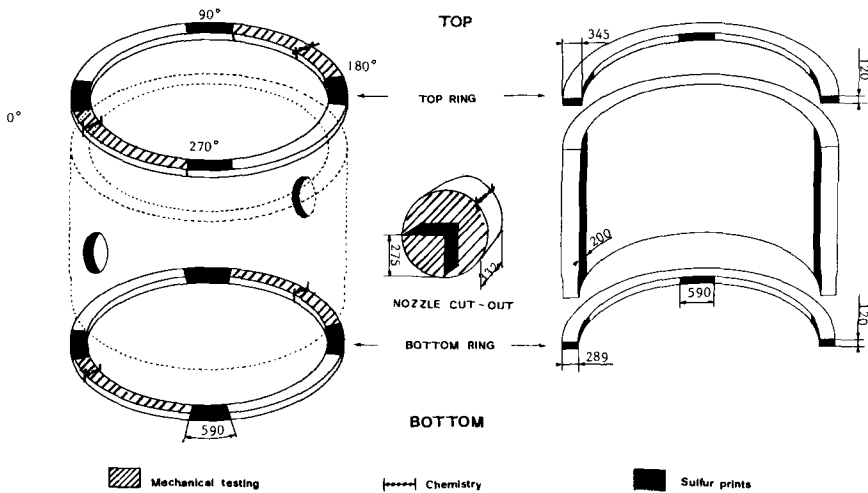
Shell and test rings manufactured from hollow ingot: location of investigated zones.
